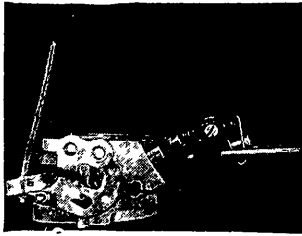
On models with Carter Starter Switch, loosen terminal cap attaching screw and remove switch from casting
